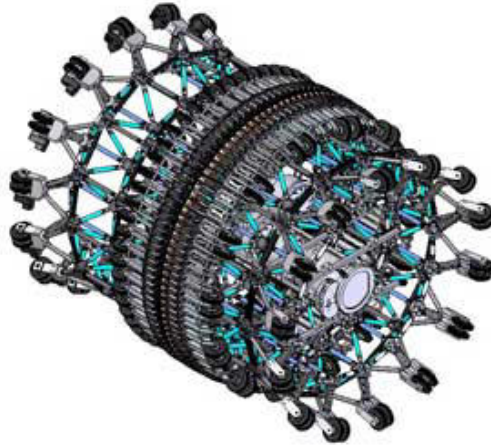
Typical MFL Tool (courtesy Pure Technologies)
